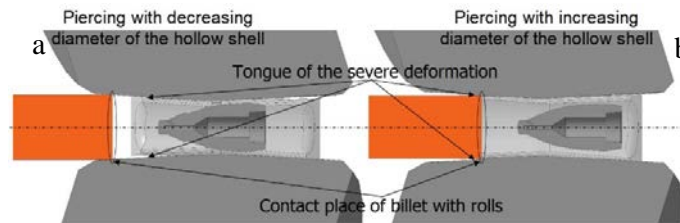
Various new roll piercing mill schemes with a severe deformation collar.
